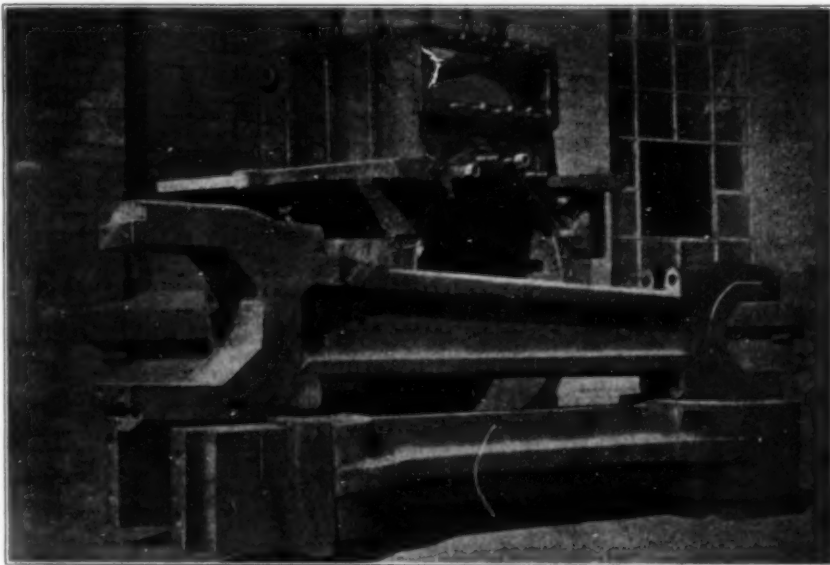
CONNECTING RODS OF LARGE STATIONARY ENGINE AND CYLINDER WELDED ELECTRICALLY.
